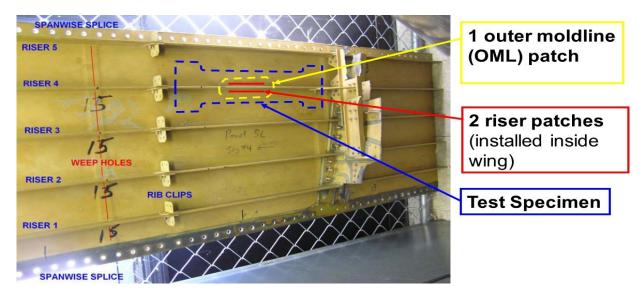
C-141 Lower Wing Skin Showing Location of Test Specimen
